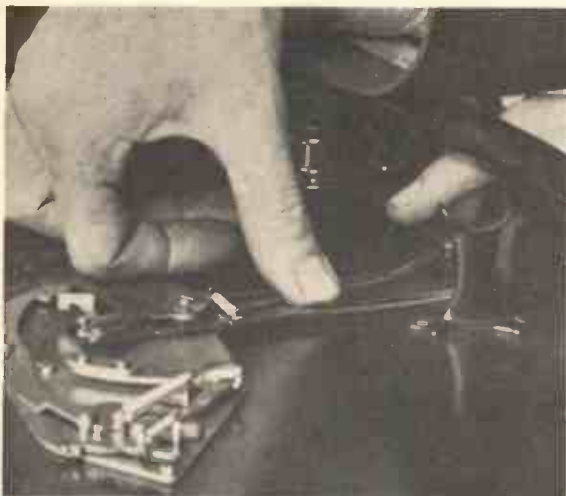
DISENGAGING THE BRAKE LEVER FROM THE PICK-UP.
